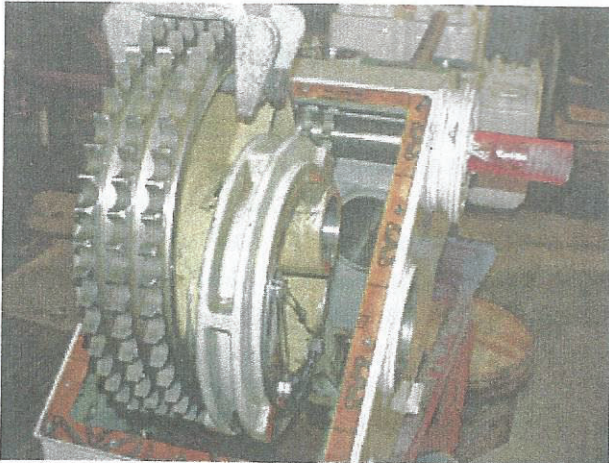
After the eccentric shaft is removed [FIGURE 14], the eccentric sprocket, connecting rods and crosshead assembly may be removed from the main frame.
